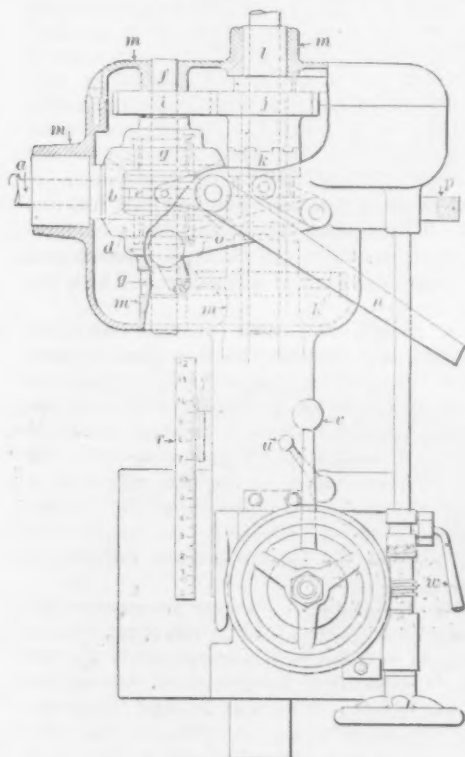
Details of the Drive of the Gang Drilling and Tapping Machine.
